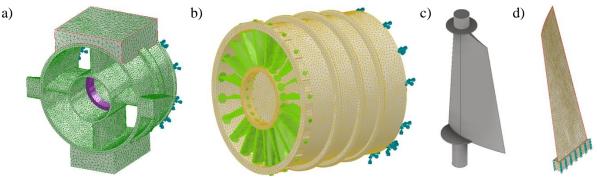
FE models of turboshaft engine structural units: a – front bearing casing; b – compressor casing; c – blade; d – vane
